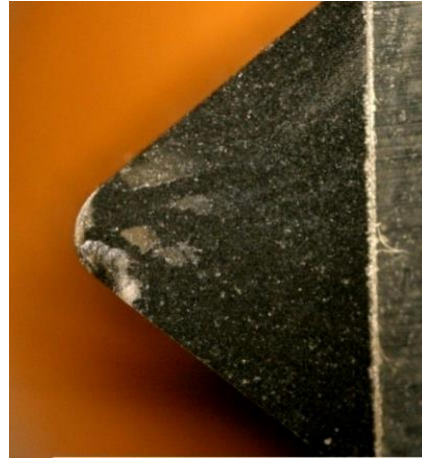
Chipping on the PCD insert under following cutting conditions
